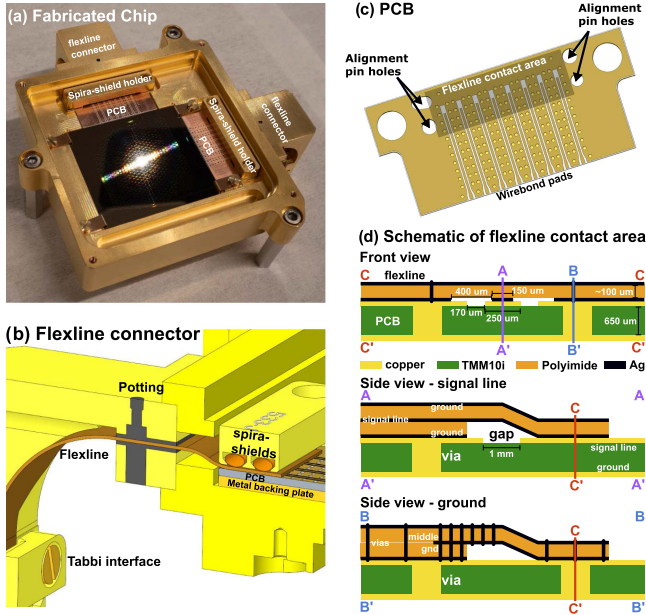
(a) Fabricated flexline connector and chip holder. (b) Flexline connector cross-section. (c) PCB with alignment holes and traces for flex to PCB transition. (d) Schematic of the flexline contact area. The PCB signal trace is wider by $400 \mu\text{m}$, which gives some alignment tolerance to the design.
